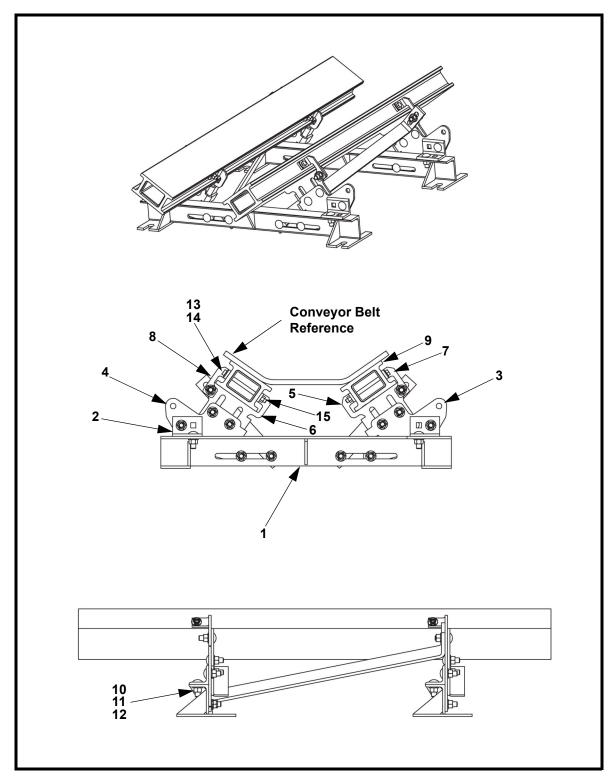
Martin® Slider Cradle Assembly (Single-Bar), P/N 36700-18XXX
